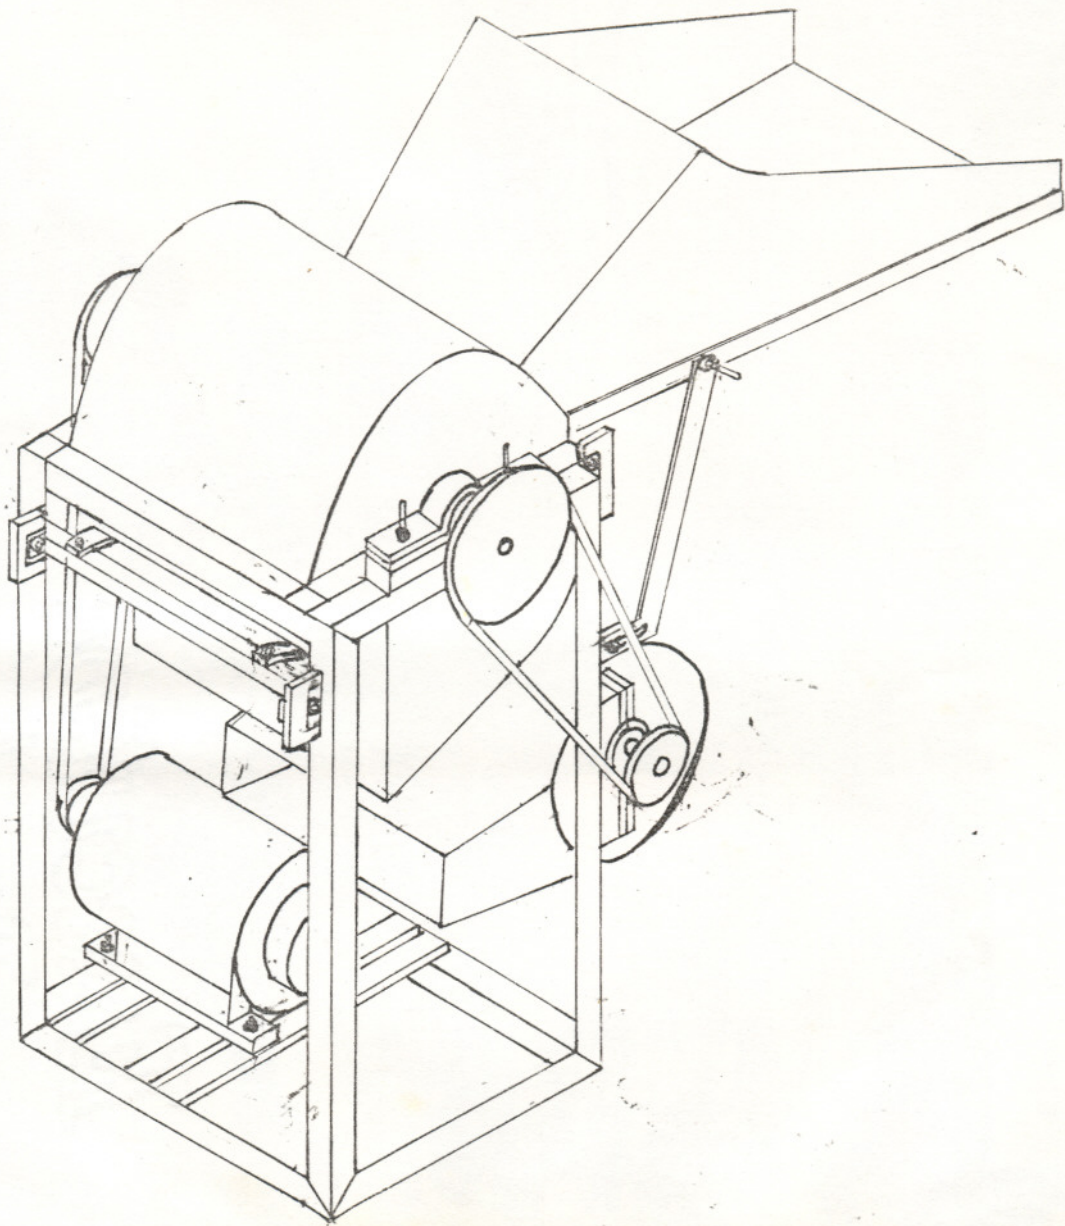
Isometric view (rear side) of low cost paddy thresher.
